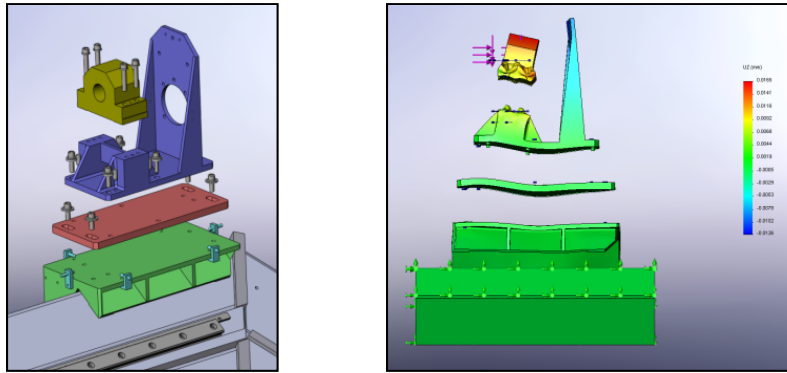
CAD exploded view of the screw drive end bearing block and mount and an exploded FEA model analysis.
